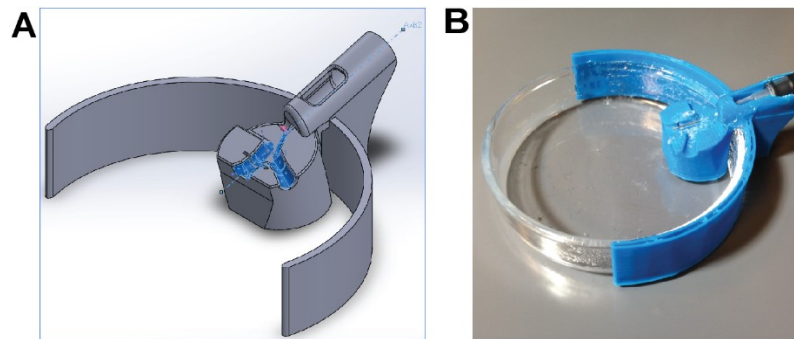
A 3D printed perfusion fixture for the right coronary arterial tree. (A) A 3D CAD model of the perfusion fixture with the arterial saddle (recessed grooves) shown in blue. (B) An example of the perfusion fixture 3D printed using PLA and positioned on a Petri dish. The syringe tip used for perfusion into the trunk of the arterial tree is visible on the right.
